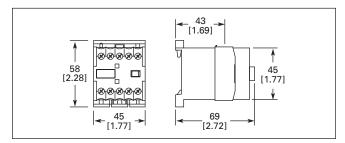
XTMCXTSA Mini Sealable Shroud — Approximate Dimensions in mm [in]
